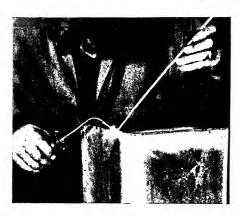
Welding corner joint in a sheet aluminum container.
